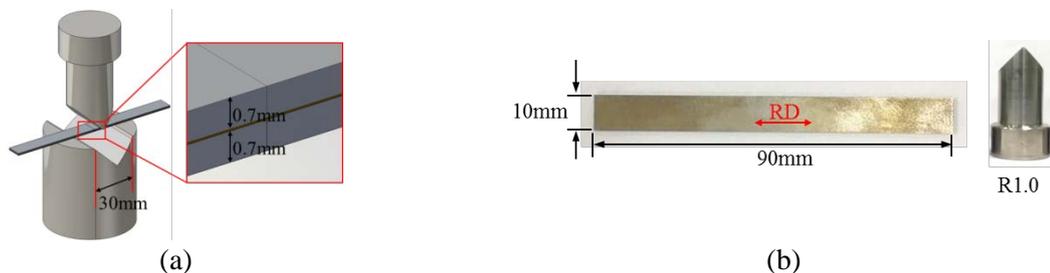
The apparatus of the V-bending test: (a) test tool setting, (b) the shape of specimen
